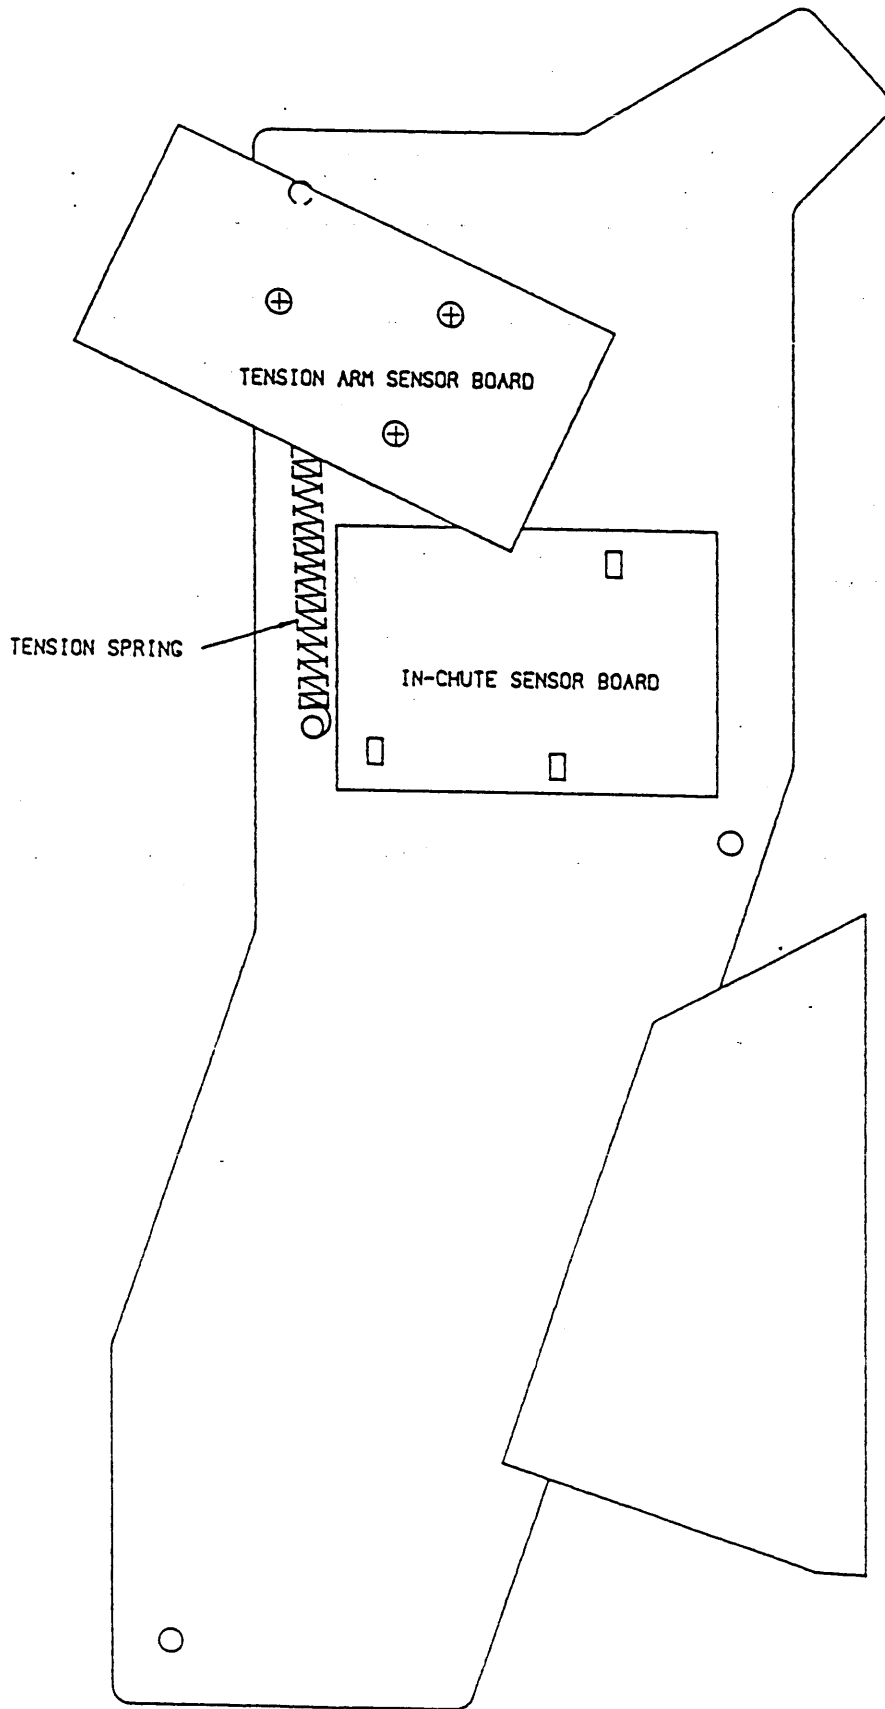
9914 TAPE PATH ASSEMBLY UNDERSIDE
